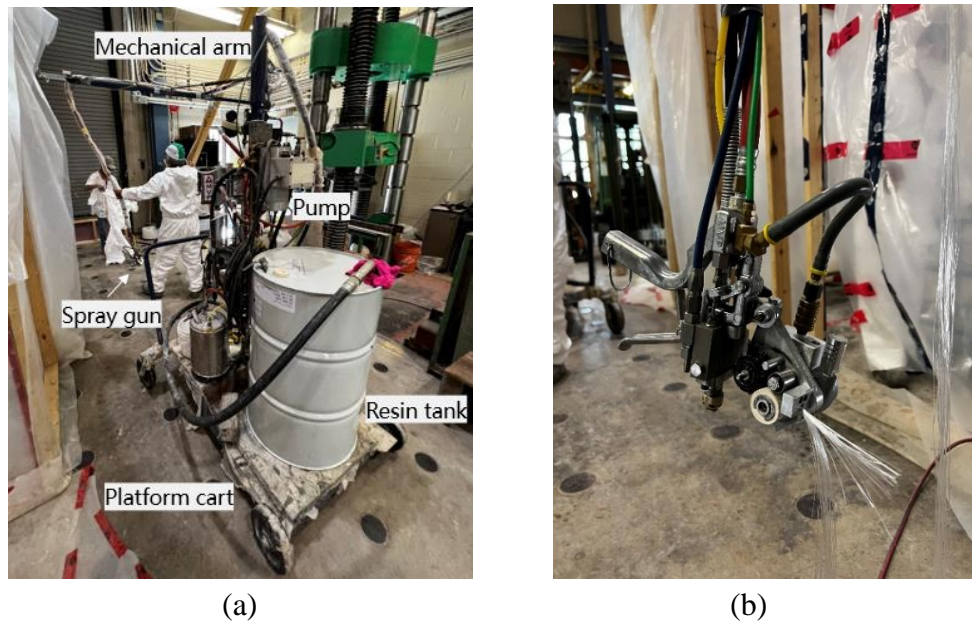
Components of the GFRP spray machine, (a) Spray machine, and (b) Spray gun.
